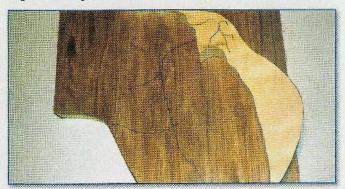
Mark the second piece by using the first piece as a template for the new cut line and the pattern for the remainder of the piece.
